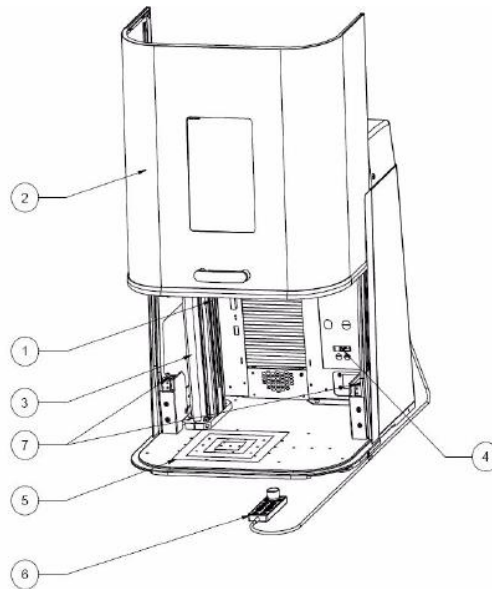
Technifor laser 1-marking head; 2-door; 3-motorized z-axis; 4-numerical counter 5-marking area; 6-remote control; 7-door locking latch [21]
